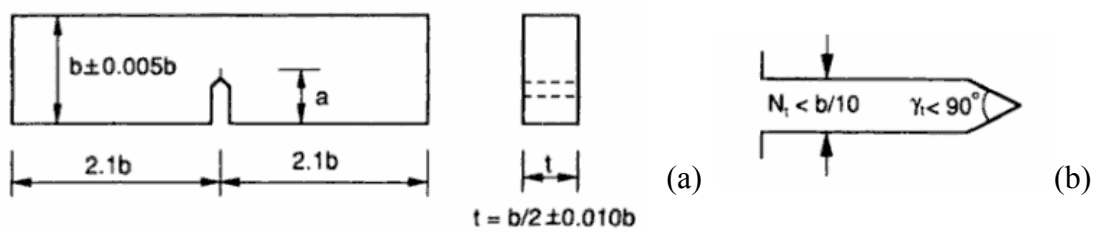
Three-point bending specimen specified by ASTM E399: (a) specimen geometry and (b) machine notch geometry
